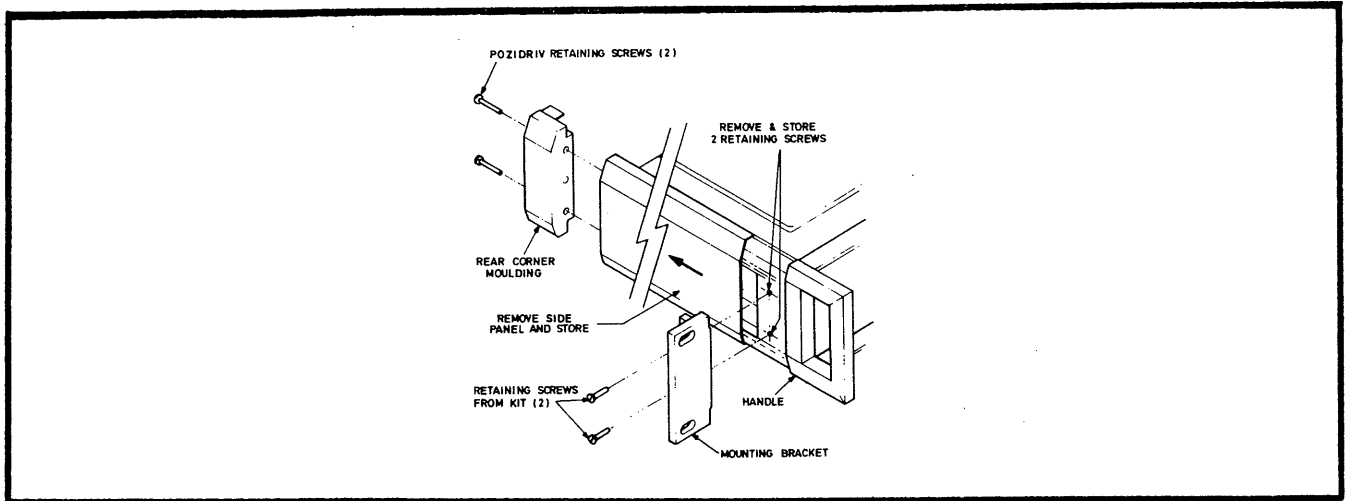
Fitting the Fixed Rack Mounting Kit
